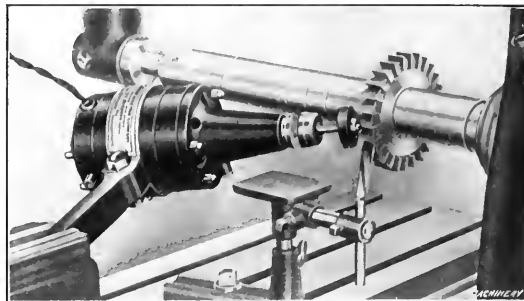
Grinding a Milling Cutter with the Racine Toolpost Grinder
